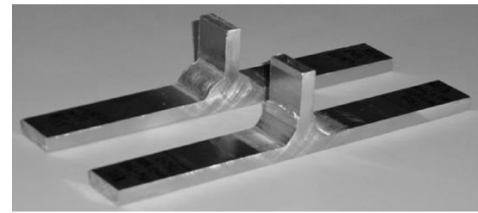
Surface appearance of an unprocessed and processed weld on AA 5083-H111 (tool D).
